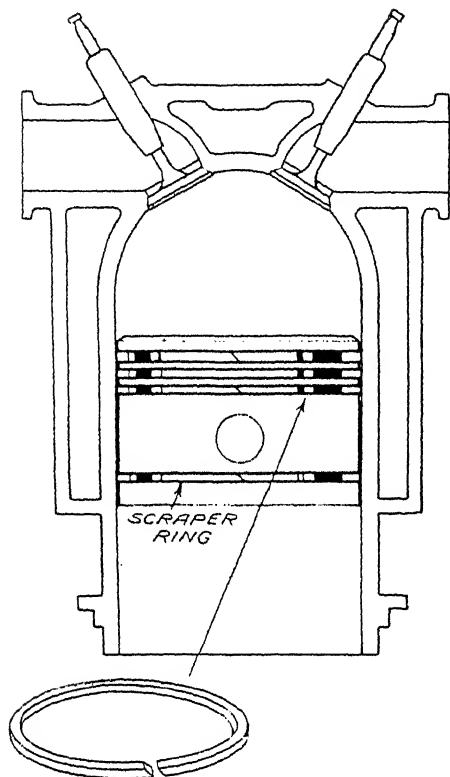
CYLINDER ASSEMBLY SHOWING PISTON RINGS.
